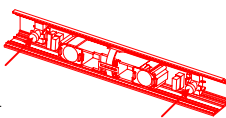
How To Change PCB unit Direction (for Left Edge Door)
